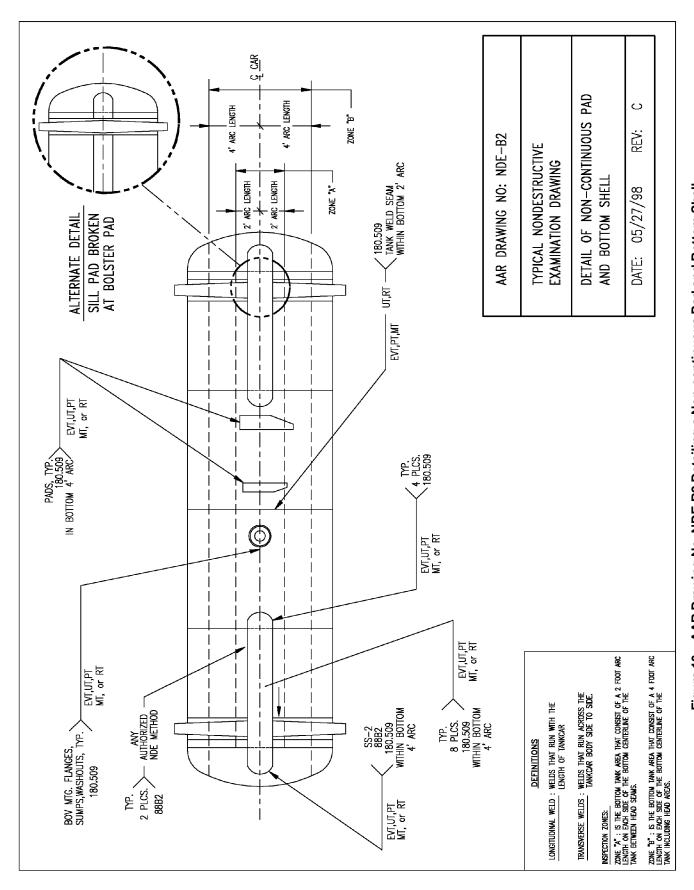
AAR Drawing No. NDE-B2 Detailing a Non-continuous Pad and Bottom Shell
